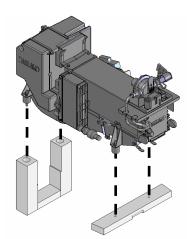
Mounting blocks have been fabricated to hold the fuel cell module in place within the scrubber.
